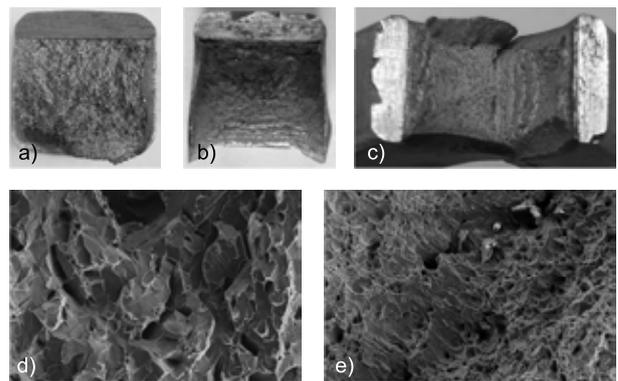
Specimen fracture modes and surface fractography: a), d) metal in initial condition; b), c), e) metal after IECT; d), e) - 1000×
